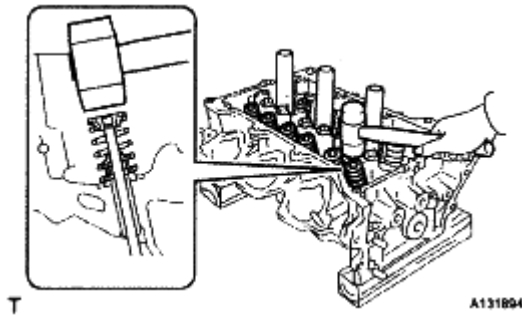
Tapping Valve Stem Tip To Ensure Proper Fit
